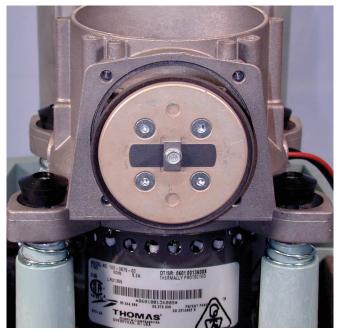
FIGURE N: INSTALLING THE PISTON CUP & RETAINER
